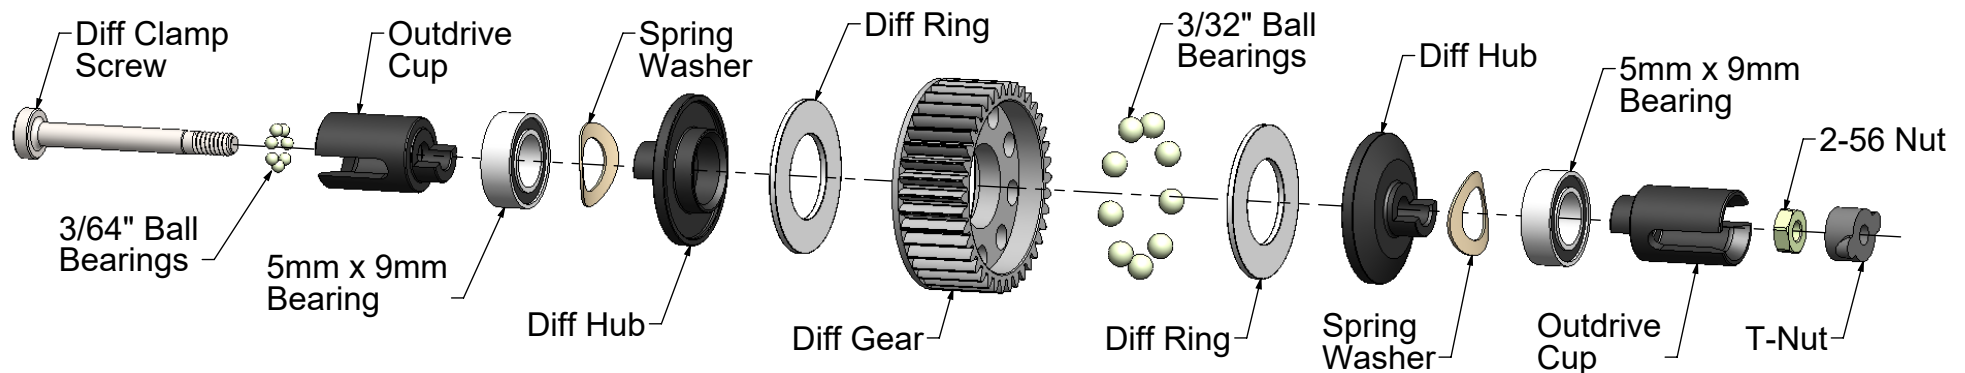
Insert the T-Nut with 2-56 Nut facing into the Outdrive Cup with a 5mm x 9mm Bearing, Spring Washer, Diff Hub & a Diff Ring. Use a small amount of "Clear" silicone grease to hold the Diff Ring in place!
